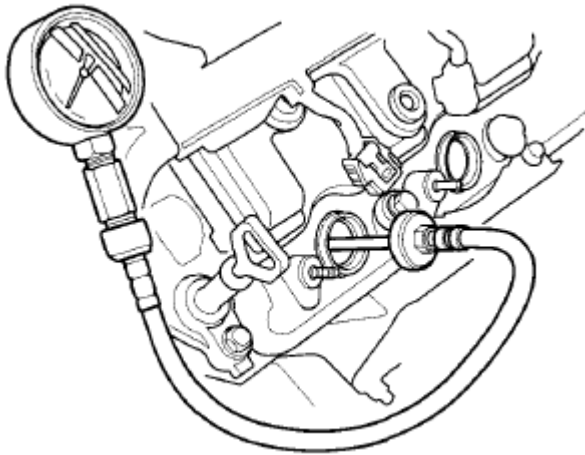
Attaching Compression Gauge To Spark Plug Hole
